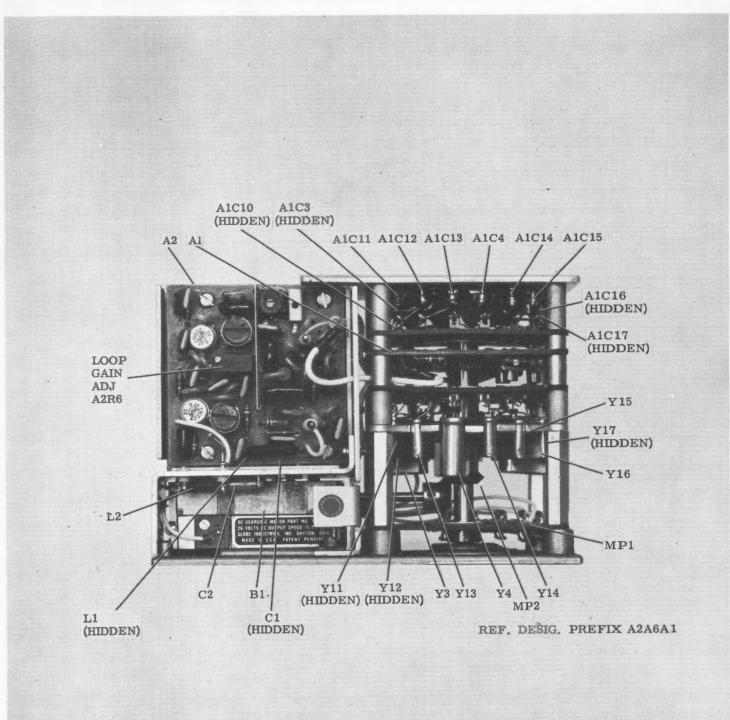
MC Synthesizer Electronic Subassembly, Front View, Component Location
